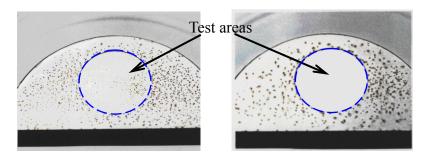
Morphology of HPM38 and HPM38S workpiece surfaces after EB irradiations
